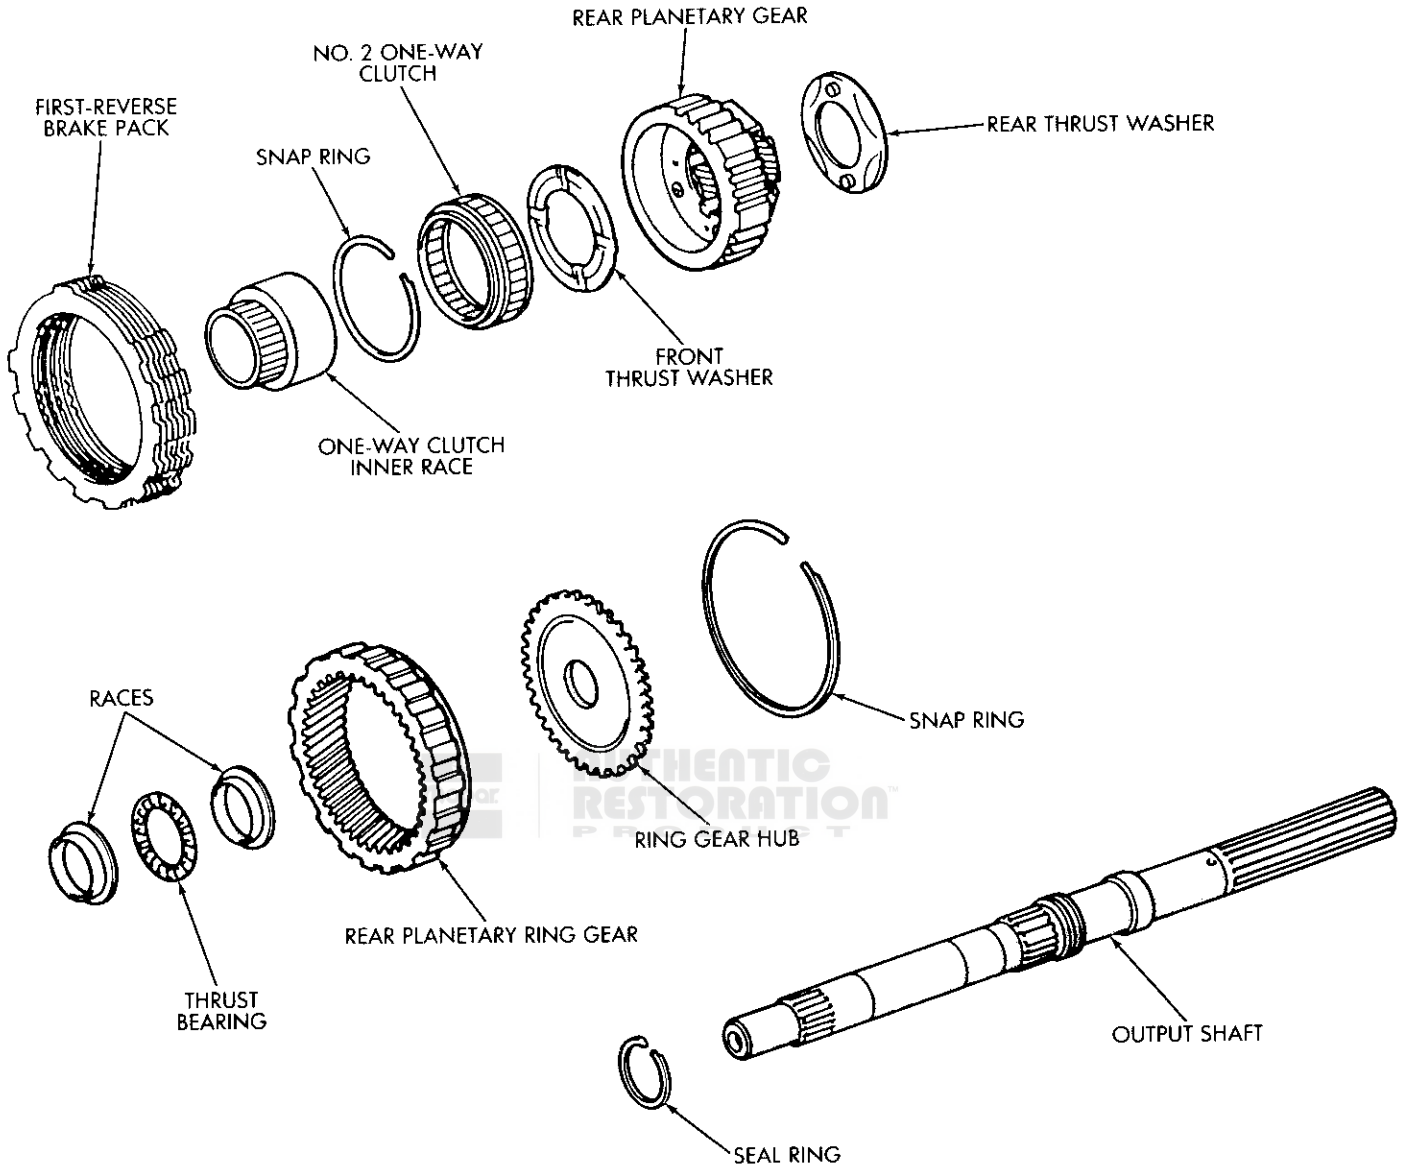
Rear Planetary, Brake Pack, Clutch And Output Shaft Components
